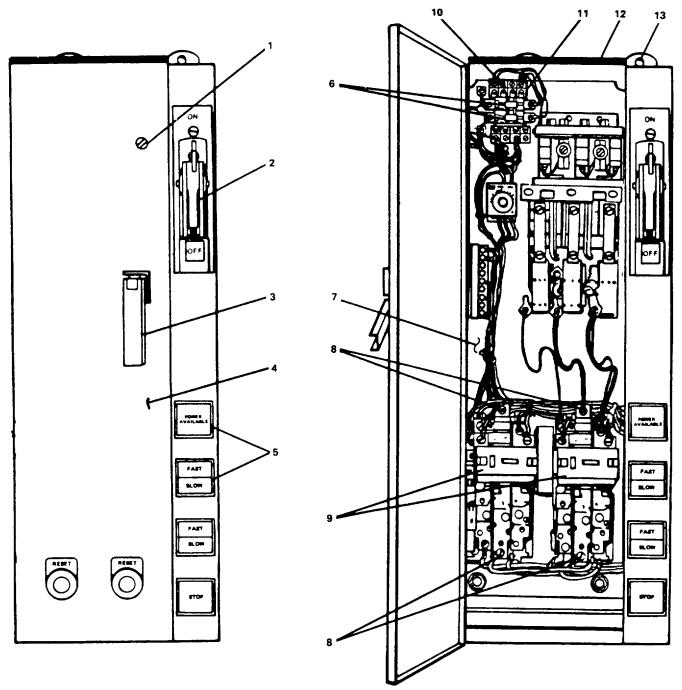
Motor Controller (Engine Room Supply Fan).
